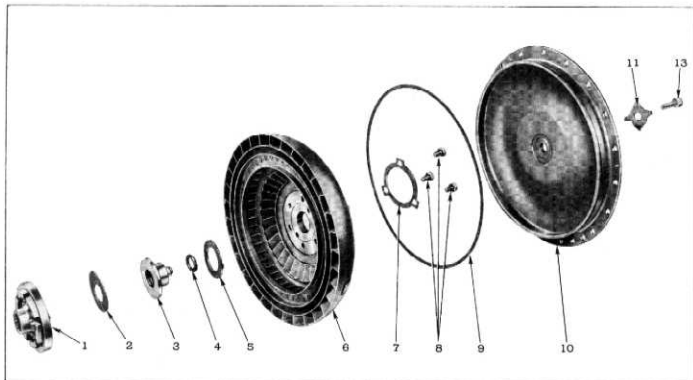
Layout of Turbine Parts after Transmission KT-22574A-15-D
